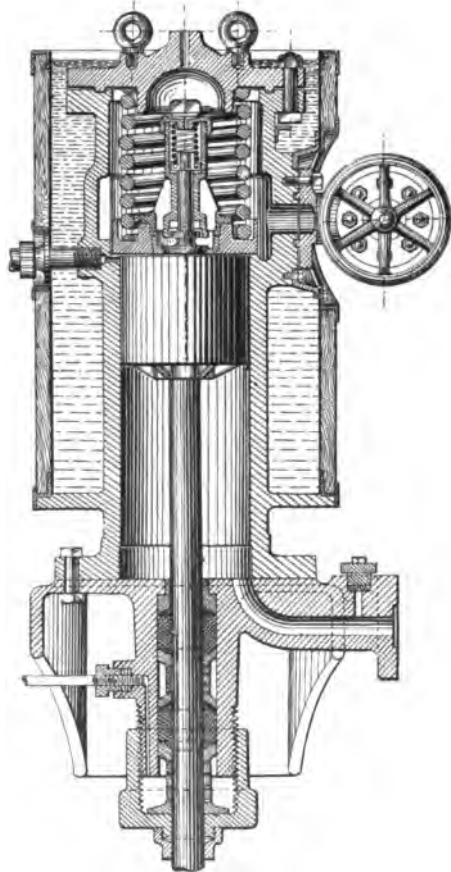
SECTION OF FRICK CO.'S COMPRESSOR.
